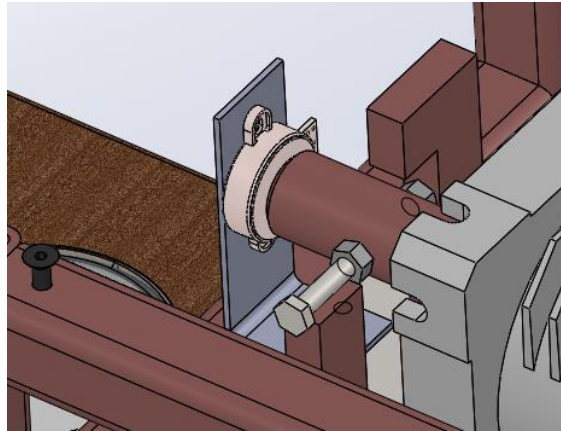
Sensor placements for measuring worktop tilt angle [7]
